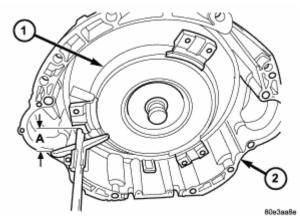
Installing Torque Converter In Transmission Housing Courtesy of CHRYSLER LLC
